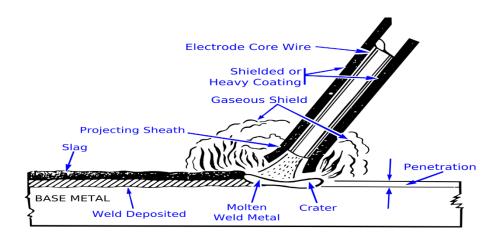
Shielded Metal Arc Welding (SMAW)
